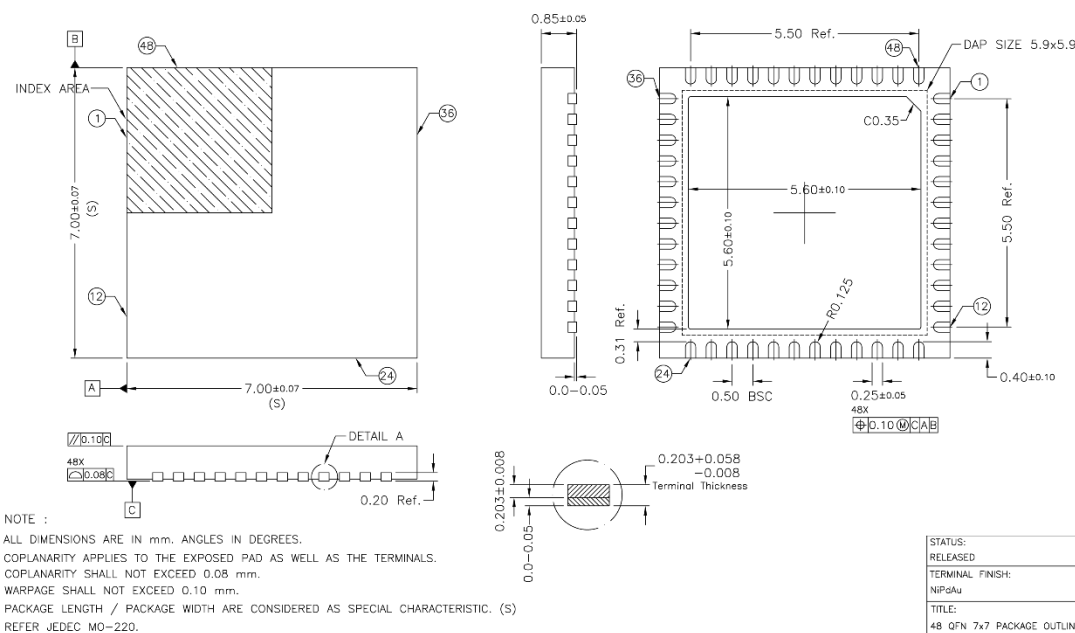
48-Lead 7mm x 7mm QFN Package Outline Drawing
